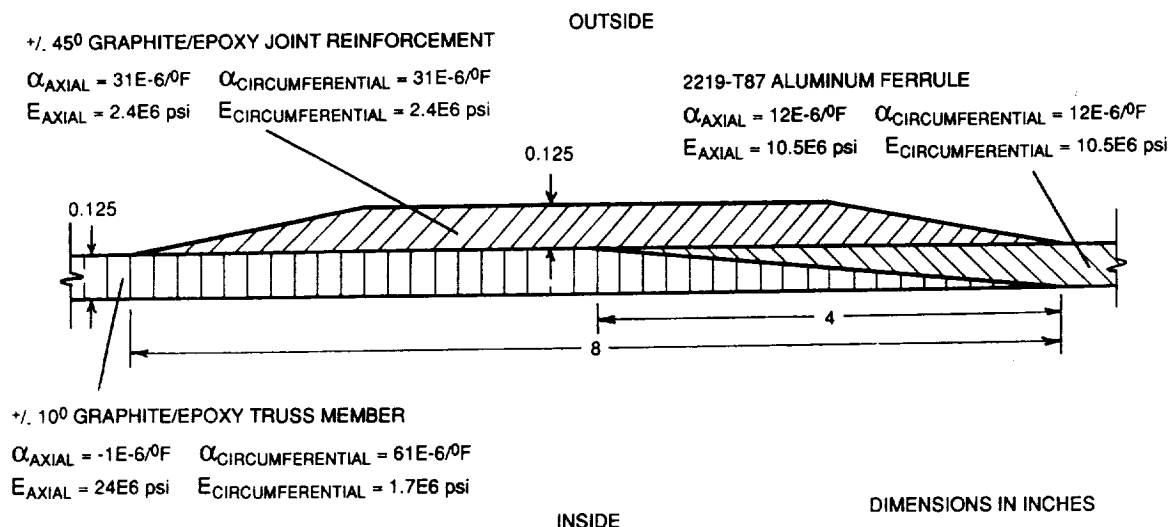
Drawing of composite material strut-aluminum end fitting joint.
